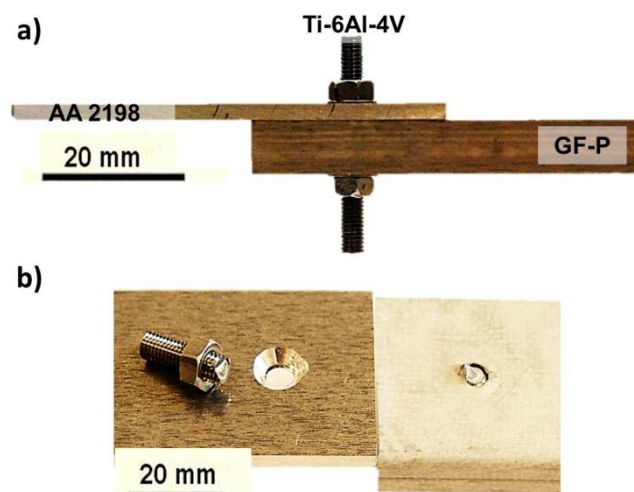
1 a) Specimen configuration of single overlap bolted joint for Ti-6Al-4V/GF-P/AA 2198; b) overview of the fracture surface of a typical bolted joint.
